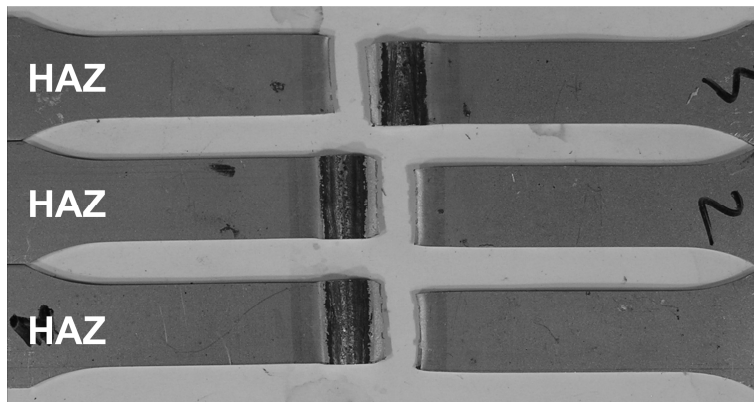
The low heat input (TB130) weld tensile specimens from the 1.20 mm DP780 '21s' sheet steel are shown after they were loaded to fracture. The weld was observed to have 100% HAZ failure.
